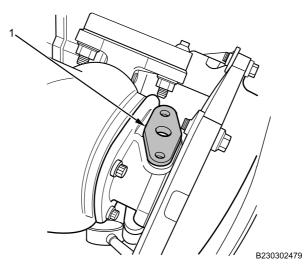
Turbocharger Lubricant Supply Line Flange Gasket.
